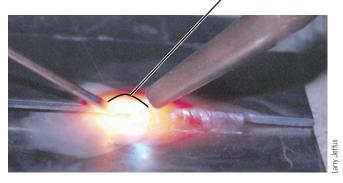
Adding filler metal to a lap joint weld.
